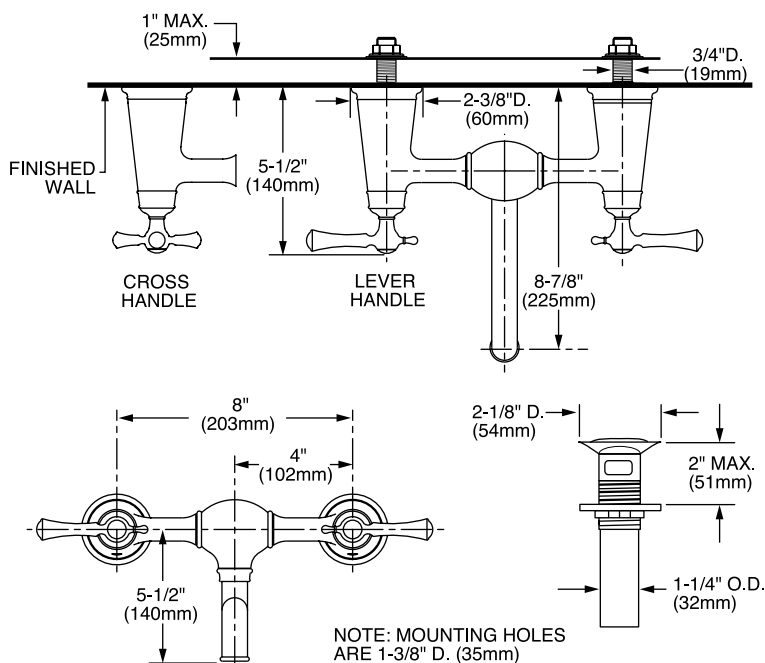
/612 Wall Mount Bridge Faucet with Lever Handles
